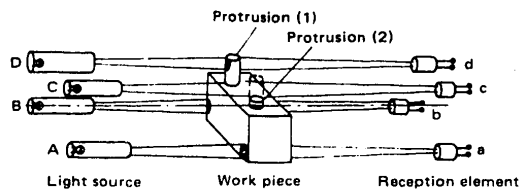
Multipoint Checking Using Photoelectric Inspection Unit
